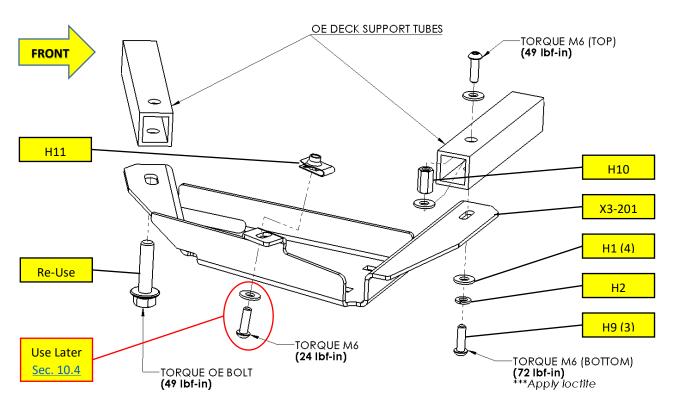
Installing Rear Air Tank Bracket, Exploded View
